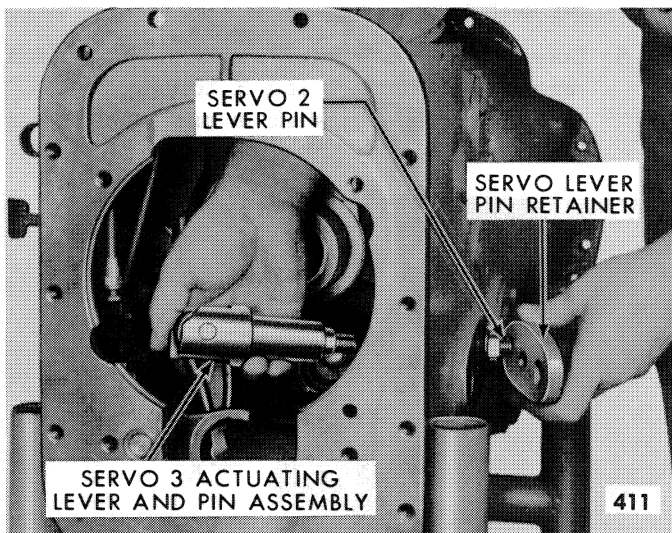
Removing the Servo Lever and Pin Assembly from Servo 3
